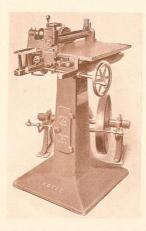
Machine for cutting bevel or rebate around edges of a halftone plate to take mounting nails.
